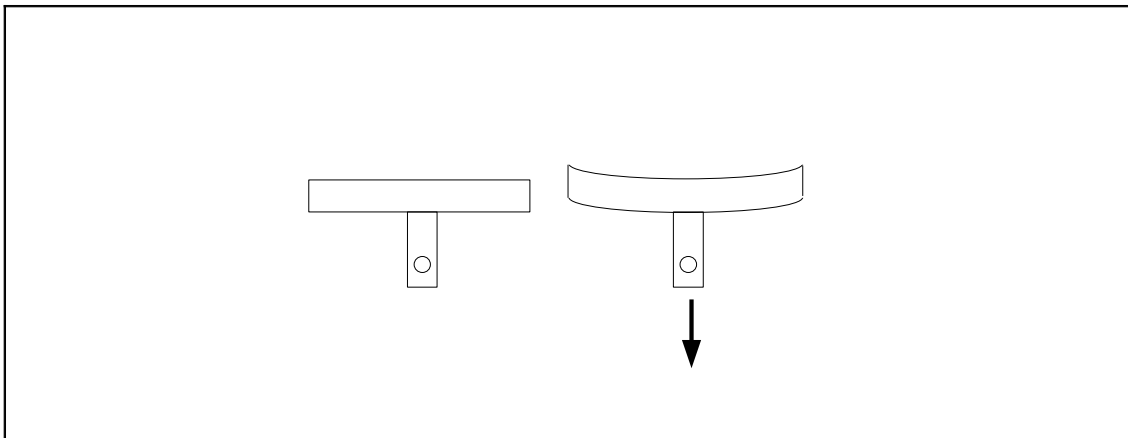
Potential Fixture Inadequacy – Exaggerated Deflection in Bending
